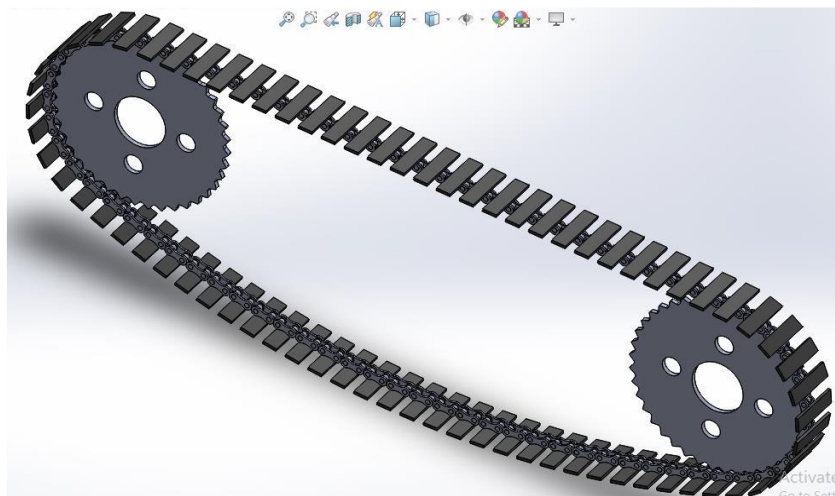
Design of drivetrain using chain and sprocket for motorbikes
